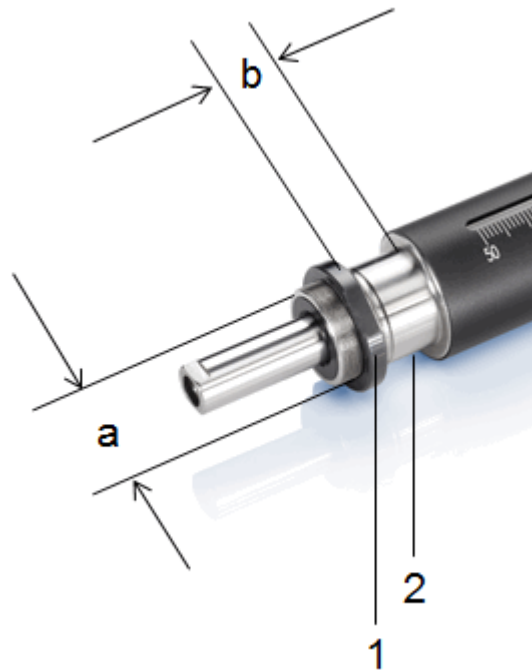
Relevant components and dimensions for installation in the mechanical mounting (schematic)
